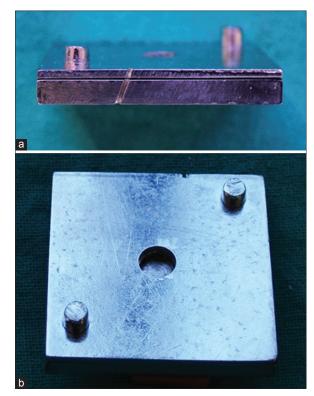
(a) Metal jig (side view), (b) Metal jig (top view)
